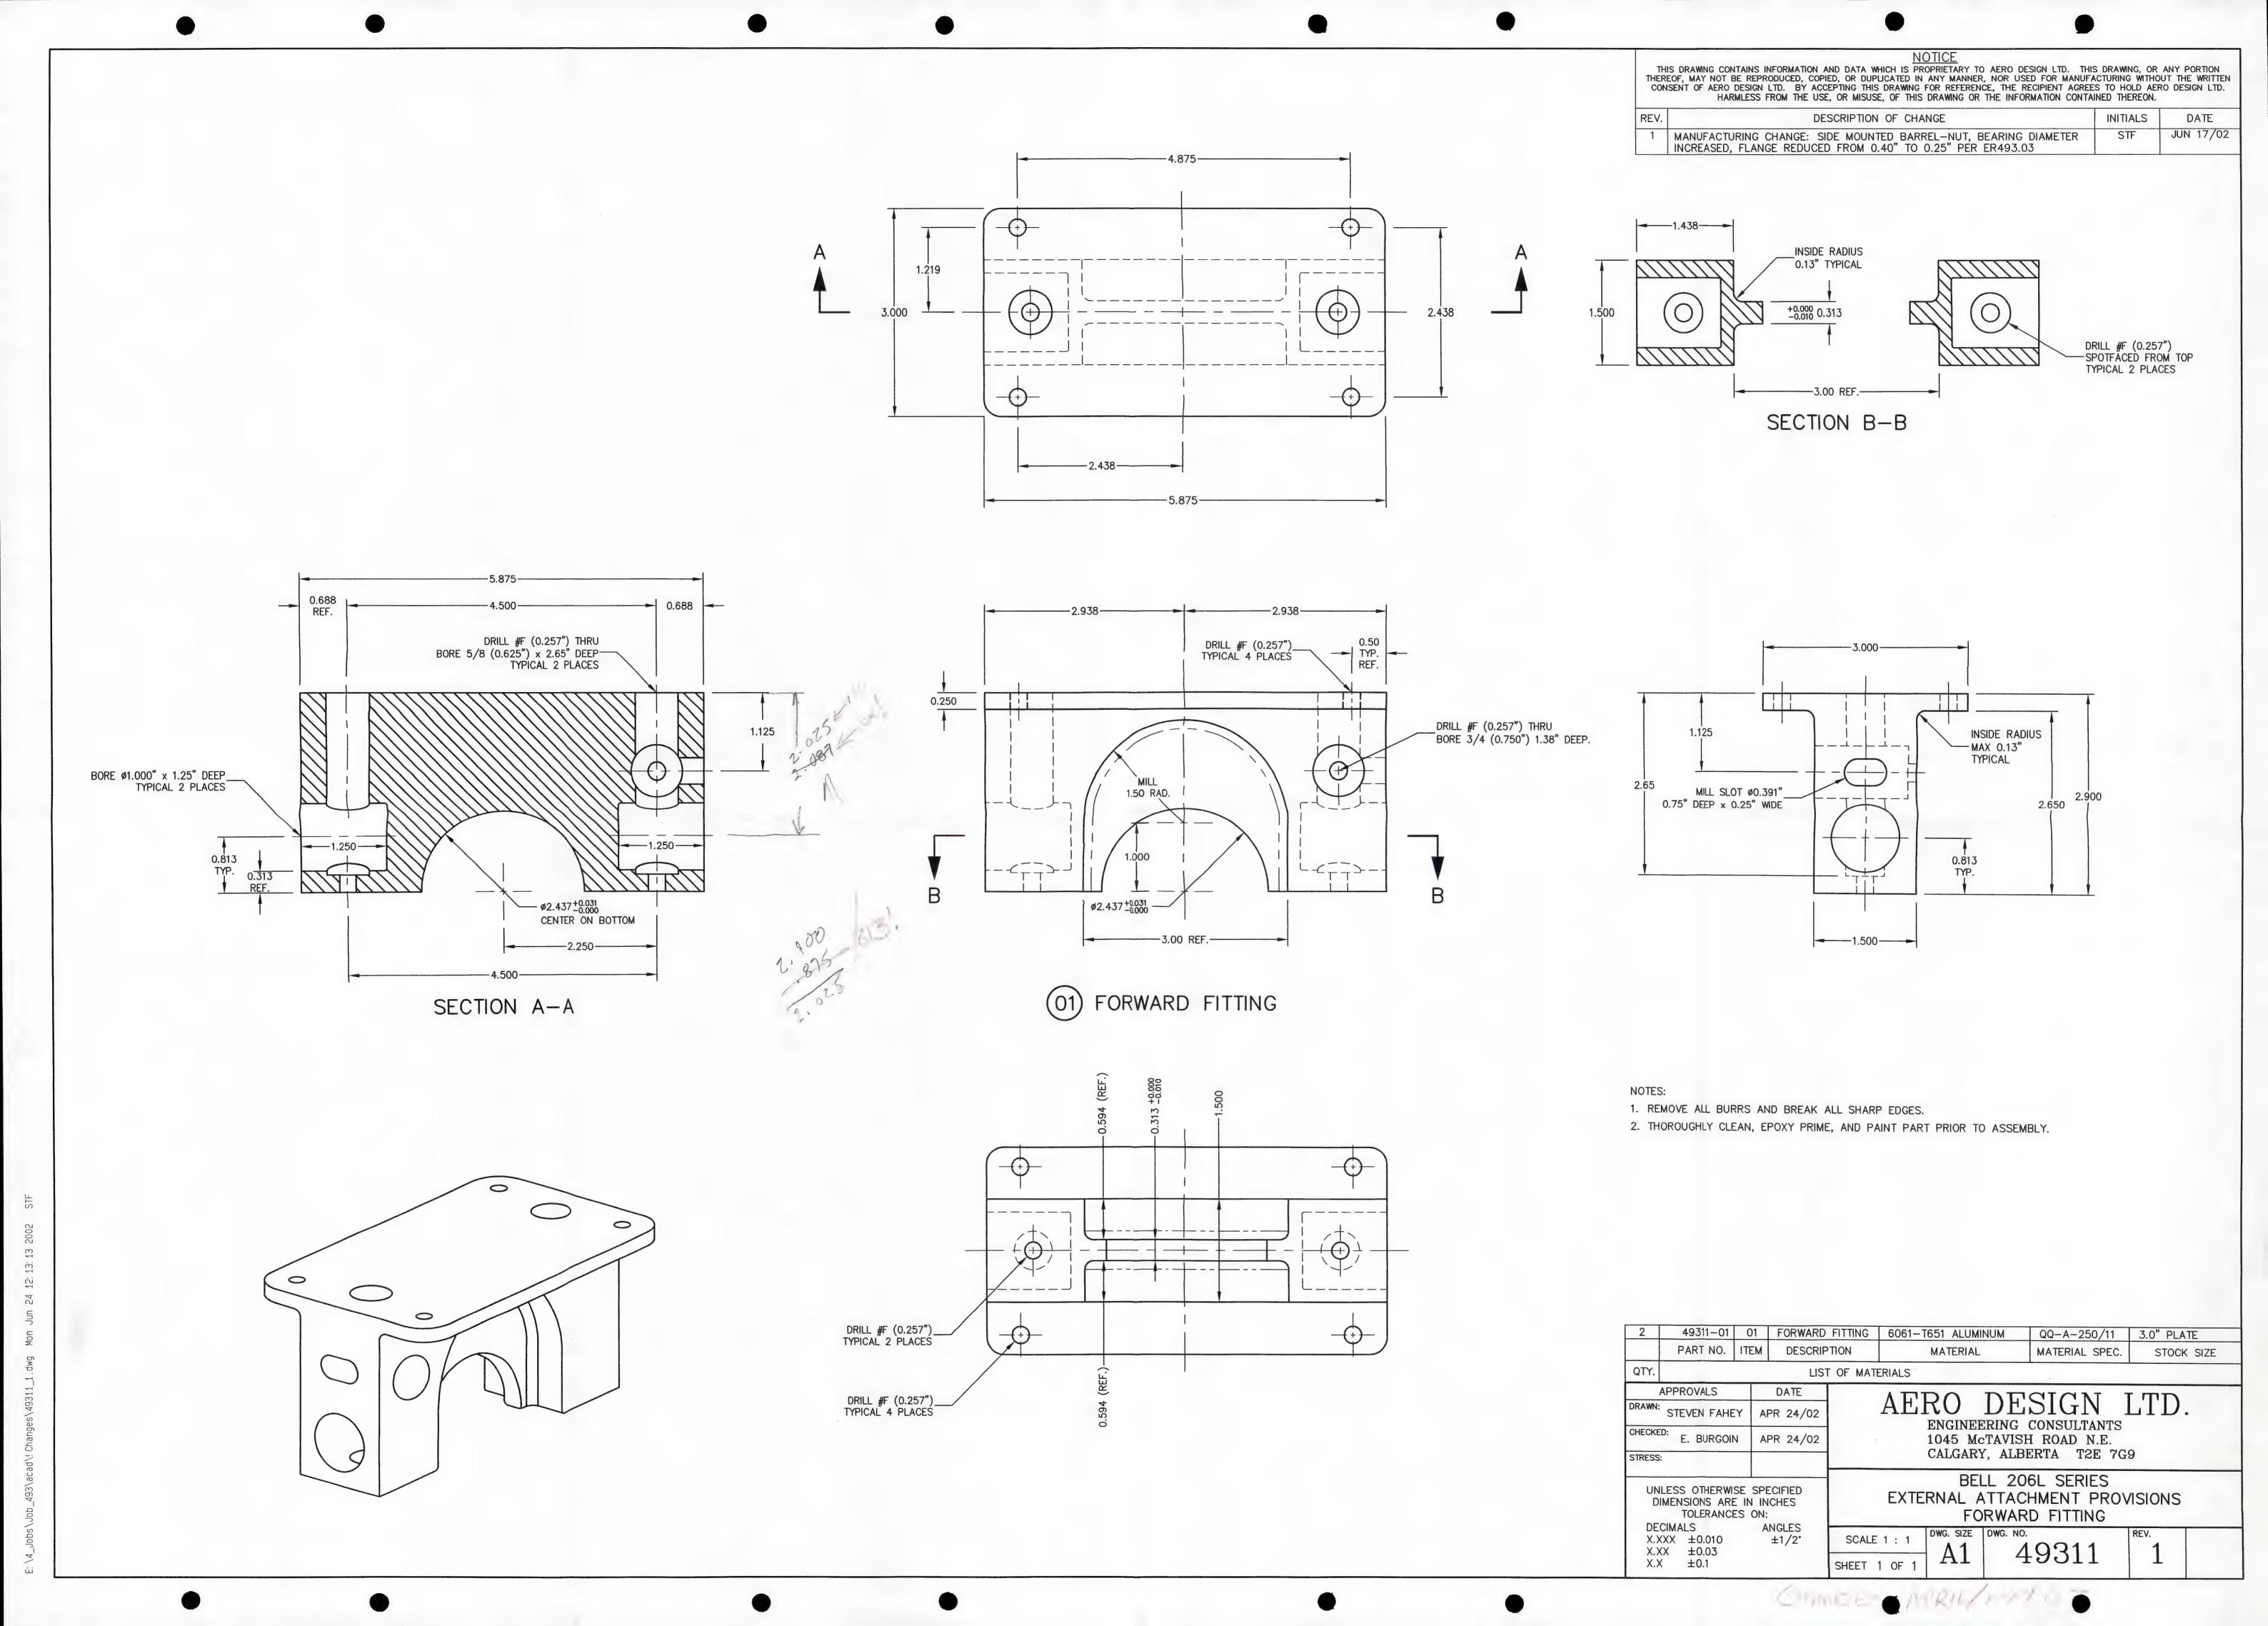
, Rev. 2 is included for reference, as it is the finished part. If you also want to quote a price on making all 20 parts start to finish, feel free to do so.
